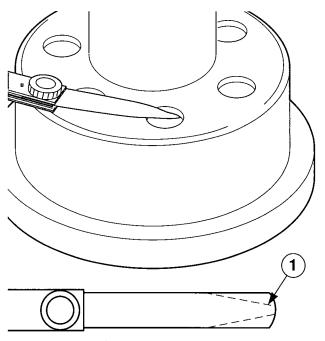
Checking bearing block seat. Trim .0015" feeler gauge so that it may be inserted into hole. (1) Trim Lines.
